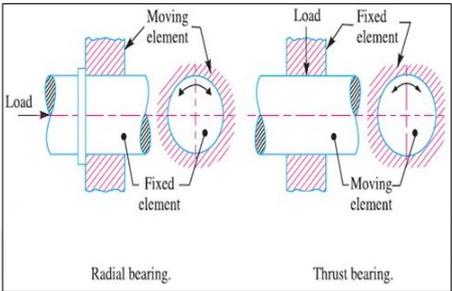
Radial and Thrust loads in the deep-groove ball bearing [51].
